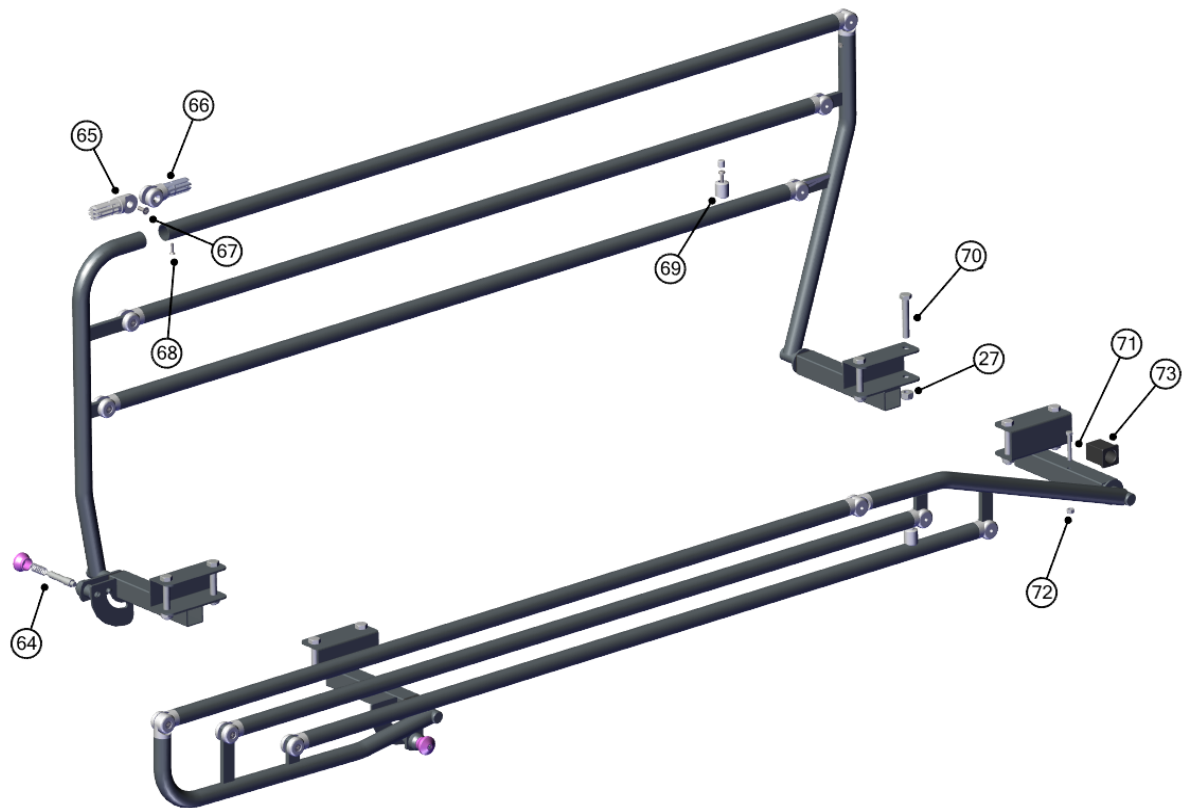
Fold Down Tubular $\frac{3}{4}$ Rail Assembly
